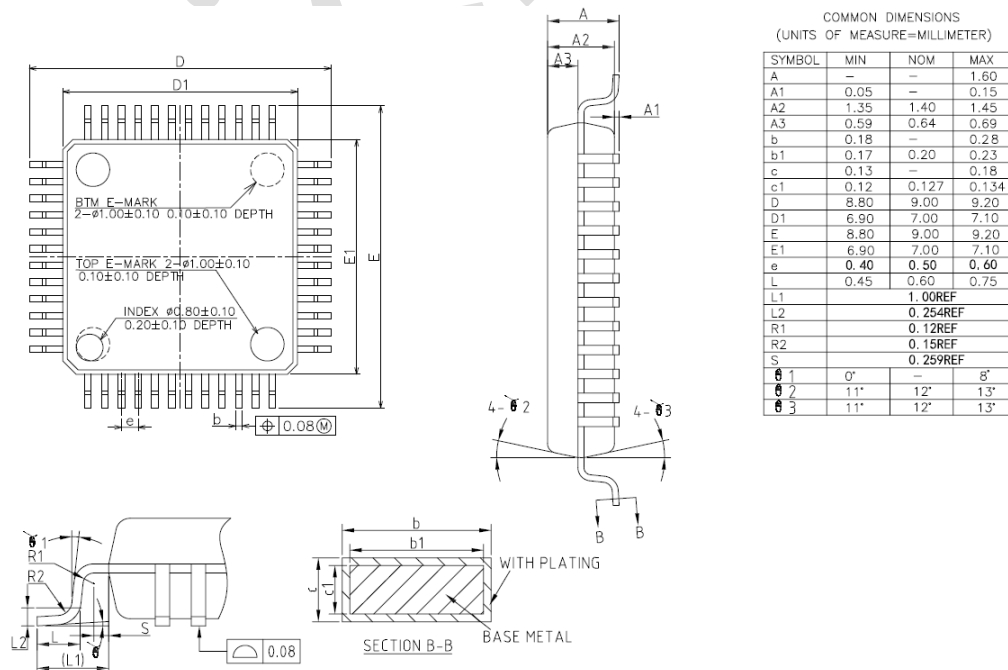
LQFP48 (7 \* 7 mm) Package Outline Drawing
